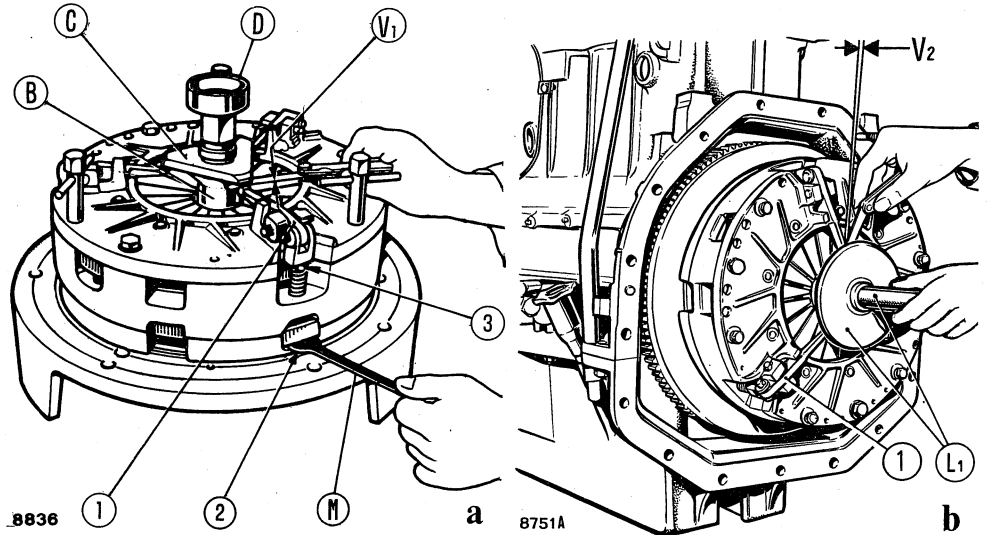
Component Parts of FERODO Clutch Universal Adjuster 293650.
